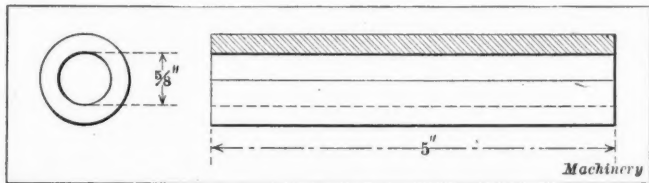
Machine-steel Piston-pin drilled with Compressed Air as Coolant
